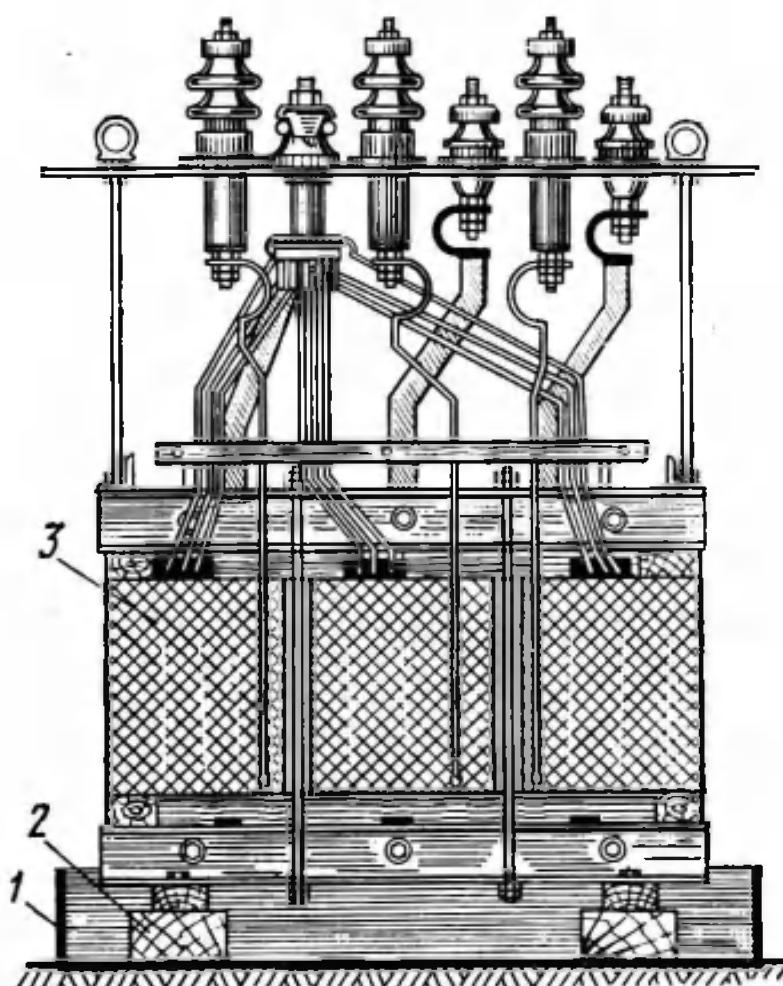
Placing the transformer for inspection (view from the HV side)
